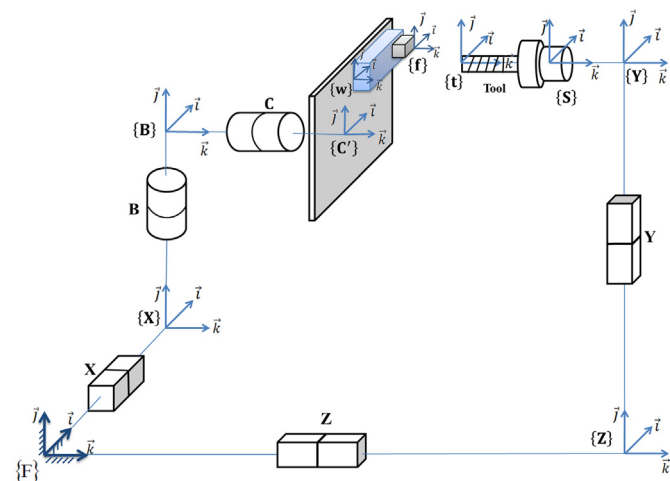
Five-axis machine tool (WCBXFZYSt) as a kinematic chain.
